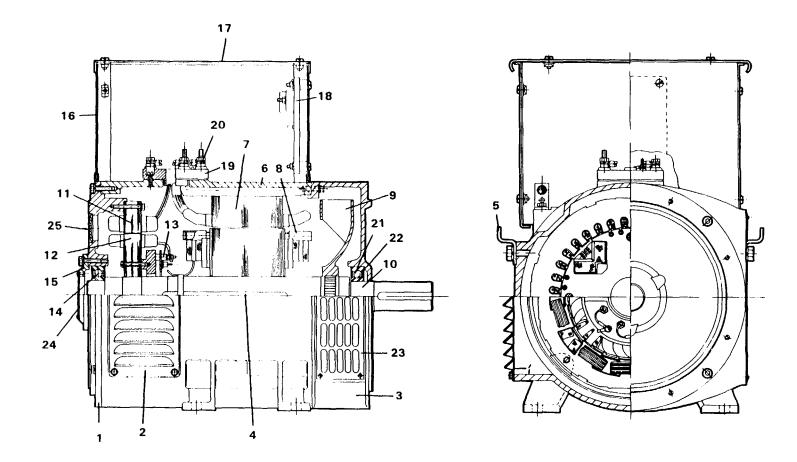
PC1 TWO BEARING MACHINE (INBOARD EXCITER)
